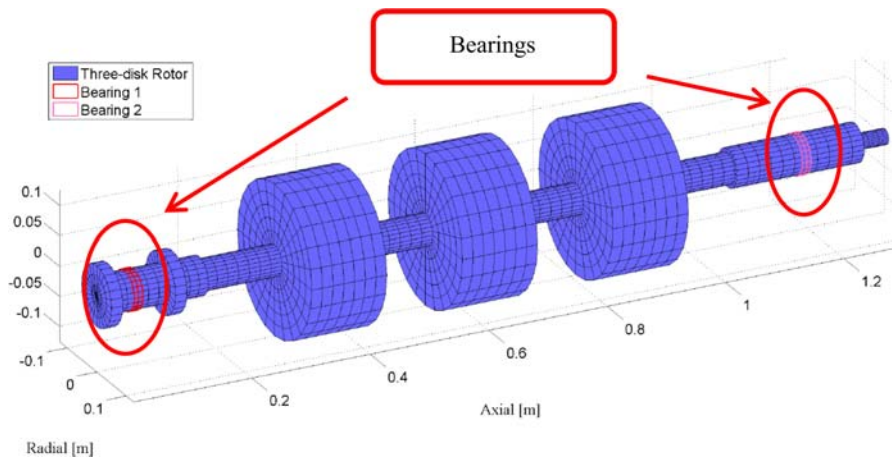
Revolved axisymmetric solid element model of a three-disk rotor with two tilting-pad bearings support
